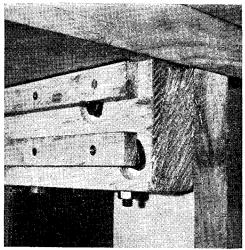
The drawer guides, and method of recessing the bolt heads
